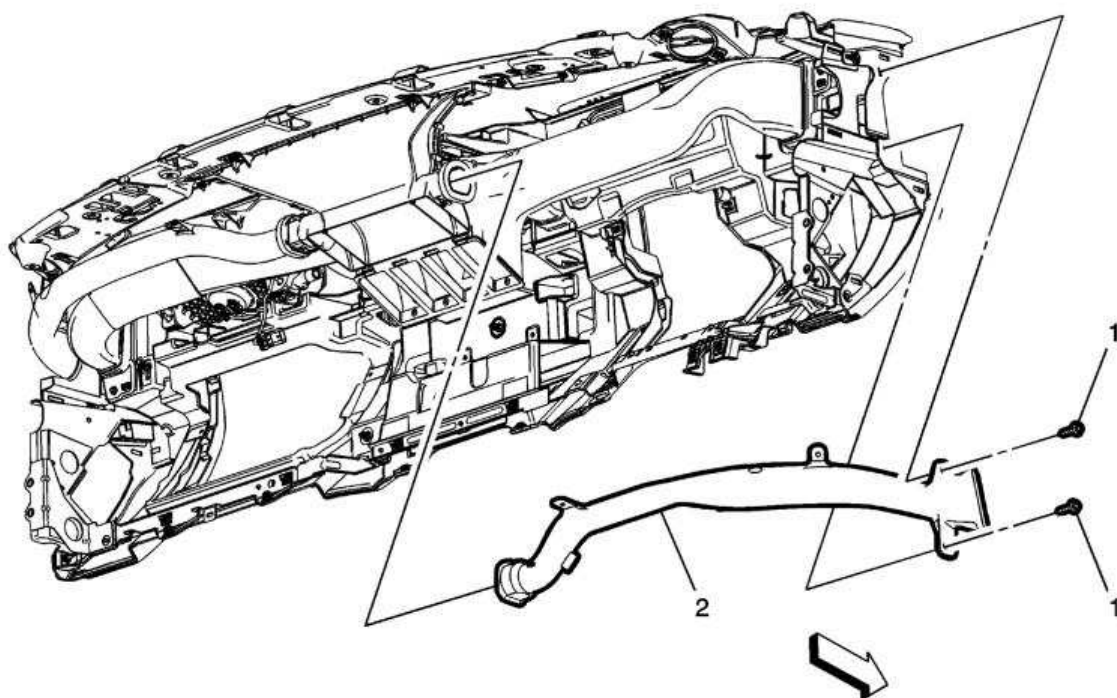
Side Window Defogger Outlet Duct - Left Side
